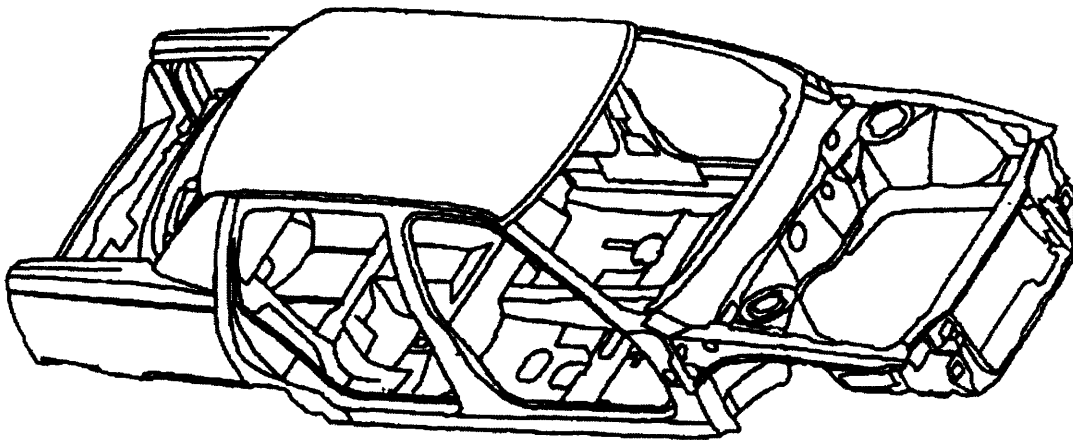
The body in white is composed of around 300 welded pieces of sheet metal
